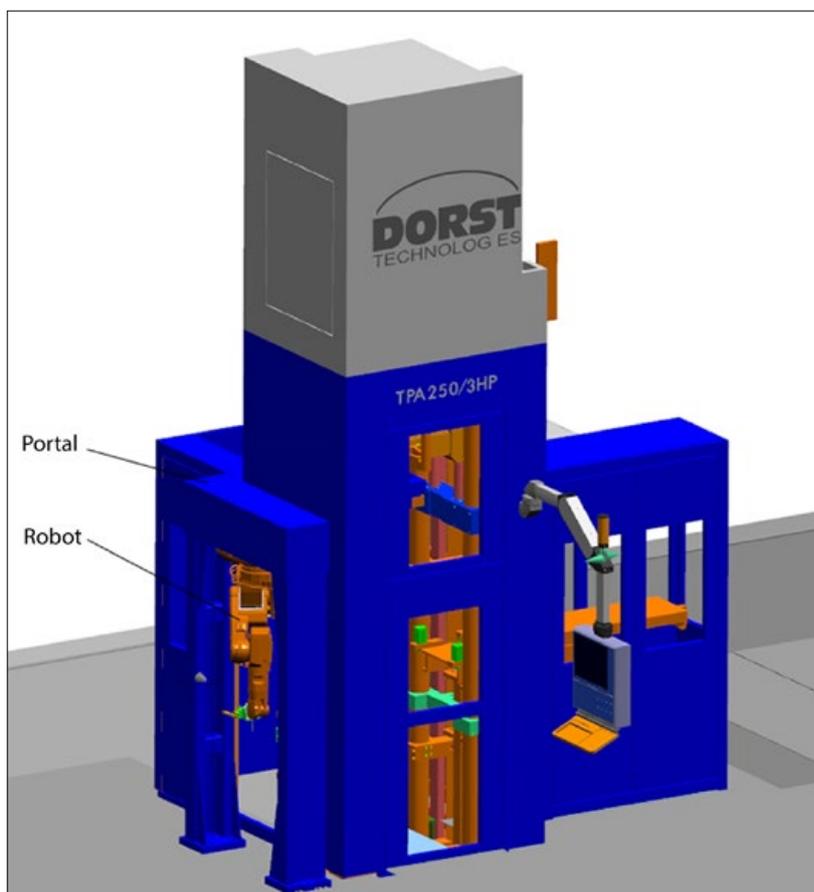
Hydraulic CNC Powder press TPA250/3HP with 6-axis overhead robot
